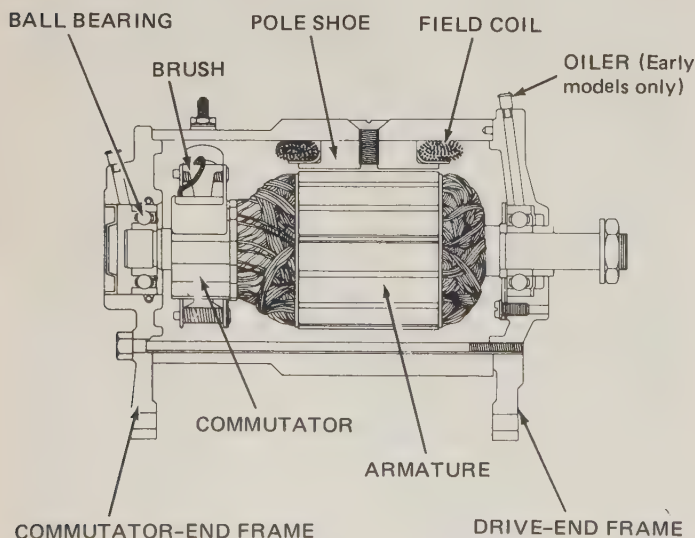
Sectional view of a starter-generator. (Kohler Company)
